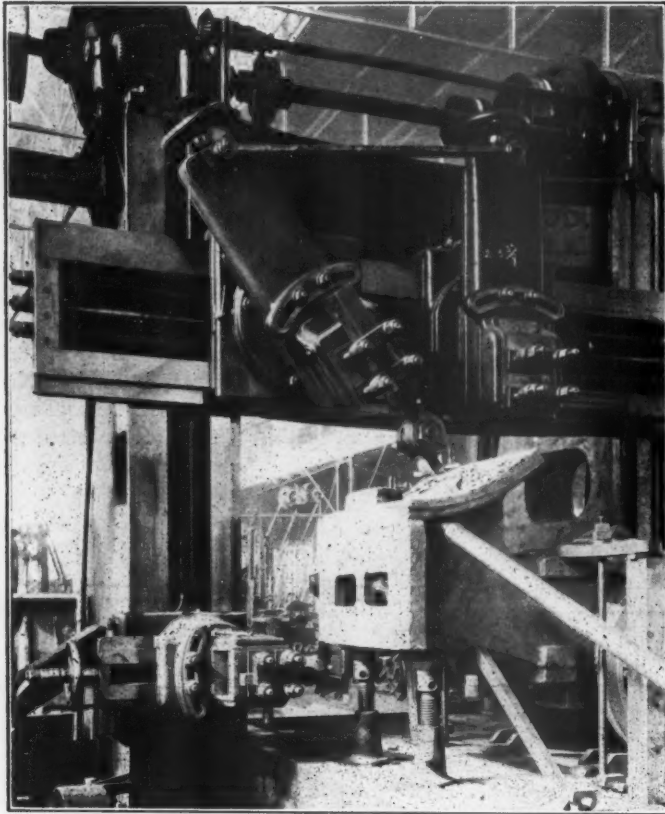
Radius Attachment for Planing Cylinder Saddles.
